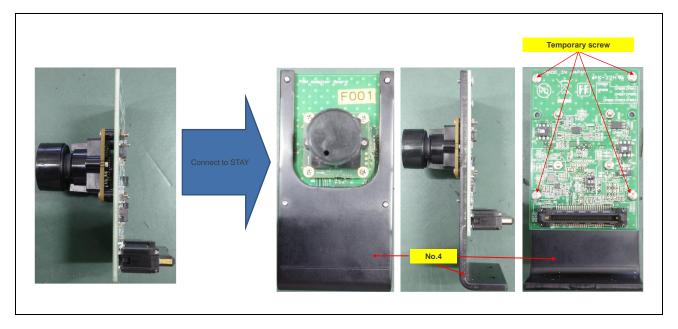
Connect FSM Adapter Board to Stay (FSM-AR1335)
